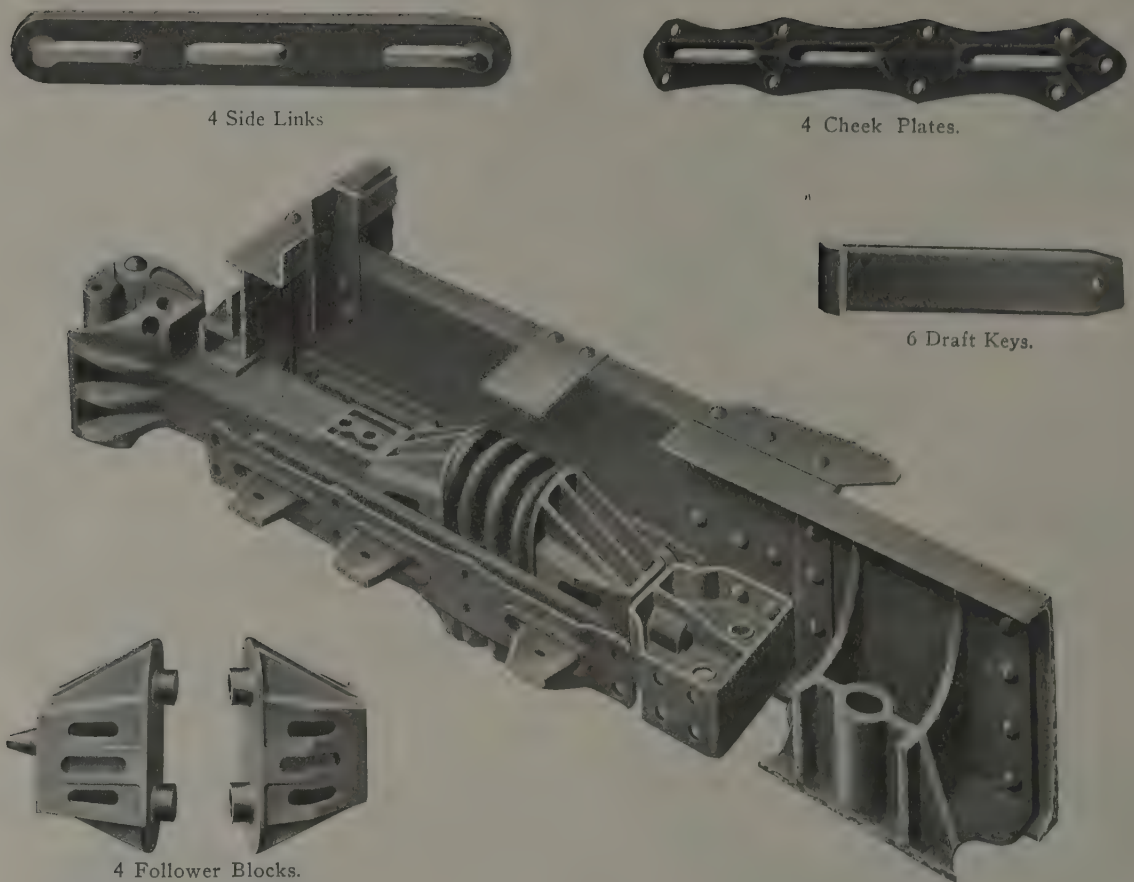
Farlow Three-Key Draft Attachment for Use with M. C. B., Class G, 8 in. by  $7\frac{1}{8}$  in. Twin Springs, and Parts for One Car. T. H. Symington Company.
